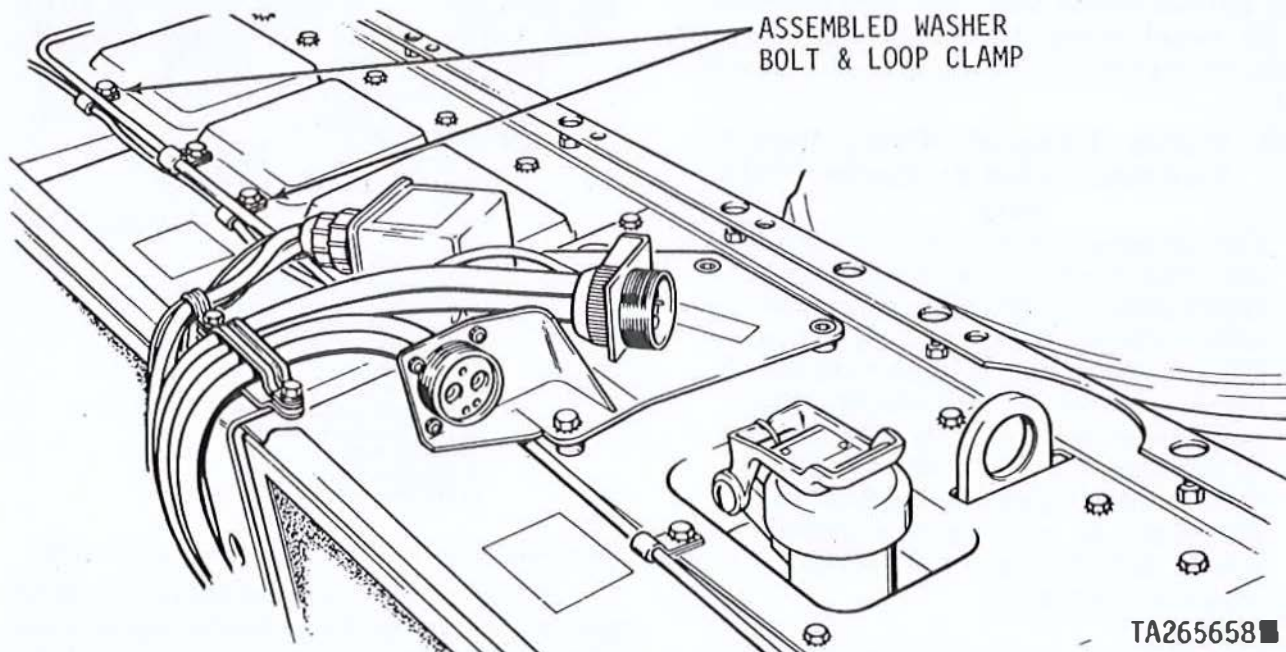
Removing or installing smoke generating system electrical lead.
